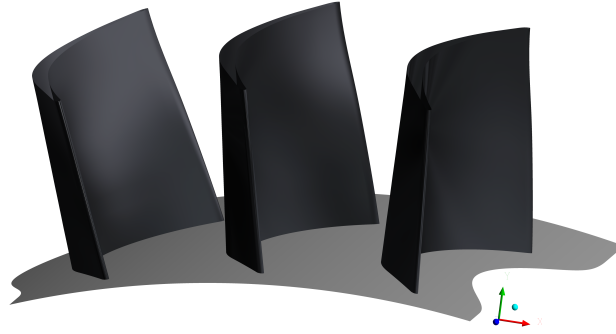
VIEW OF THE THREE-DIMENSIONAL ROTOR BLADE.
